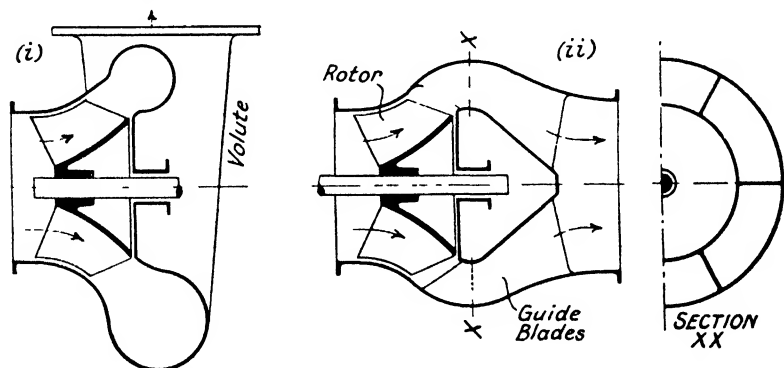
Recuperators for (i) screw pump, (ii) half-axial pump.
